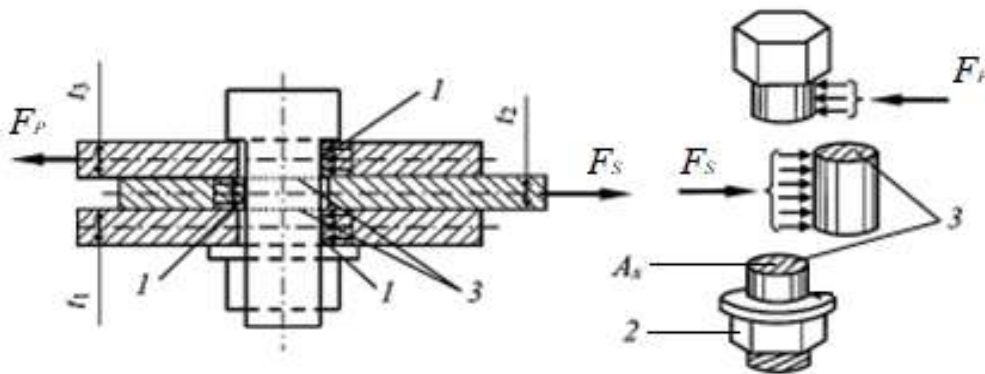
Cross section of bolt joint of pawl-lever-pawl
